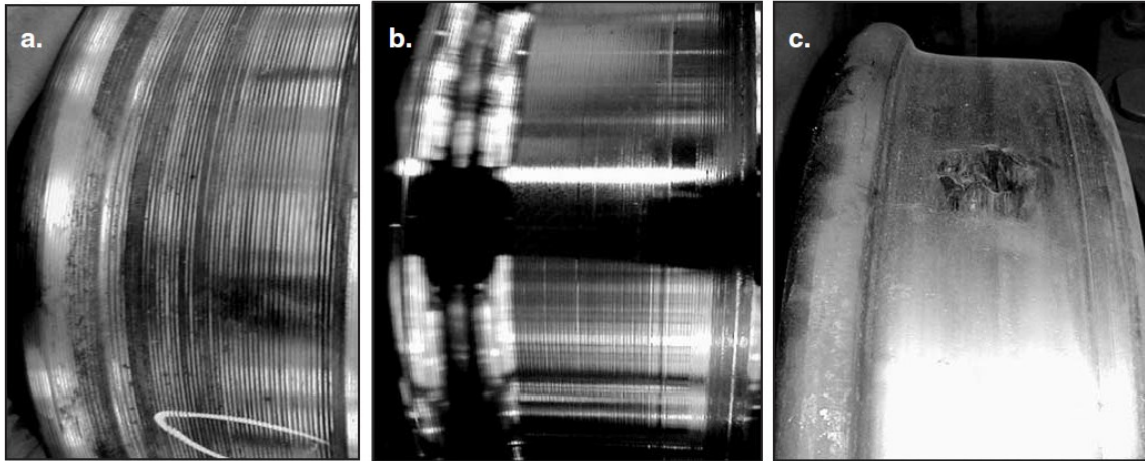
Comparison of wheel surface roughness ([a] surface after wheel re-profiling from milling type machine, [b] surface after wheel re-profiling from lathe type machine, and [c] surface of wheel back from operation with a flat spot.) [8].
